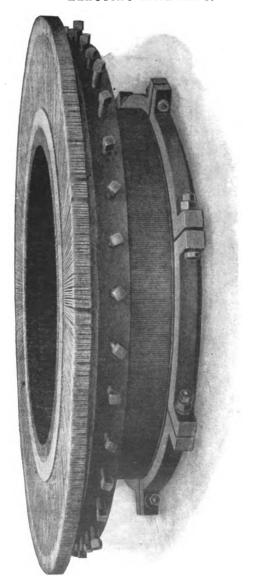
CLAMPS MOUNTED ON A 1500 KW. WESTINGHOUSE CONVERTER COMMUTATOR.
